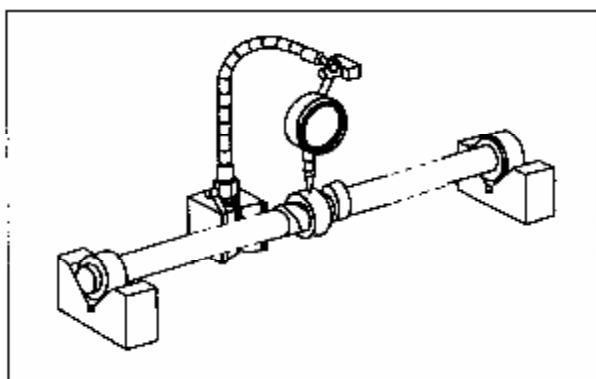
Measure Journal Run-out at Middle of Camshaft
